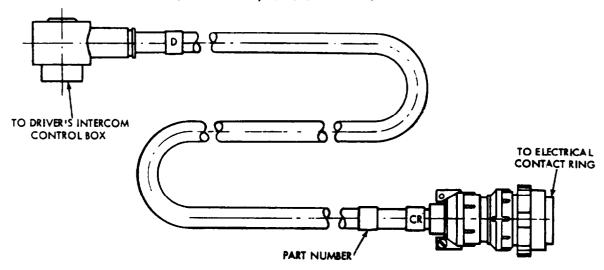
Removal/installation -driver's intercom-to-contact ring cable assembly (1 of 2).
